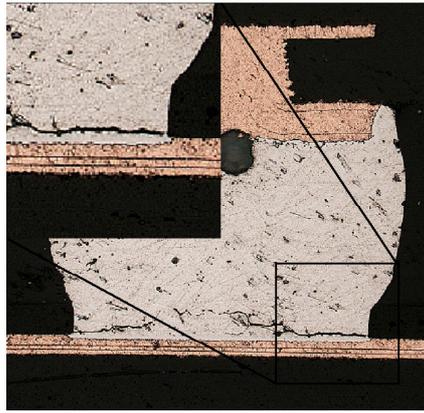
Cross section of a solder bump of PCB 1, tested in a BLCBT. The crack is initiating and growing in the solder.
